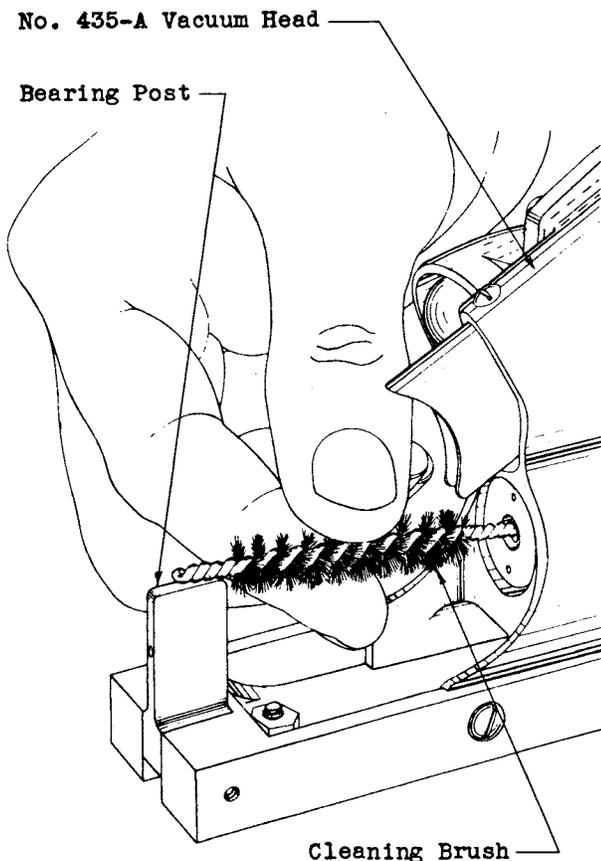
Method of Mounting Cleaning Brush in the No. 435-A Vacuum Head
